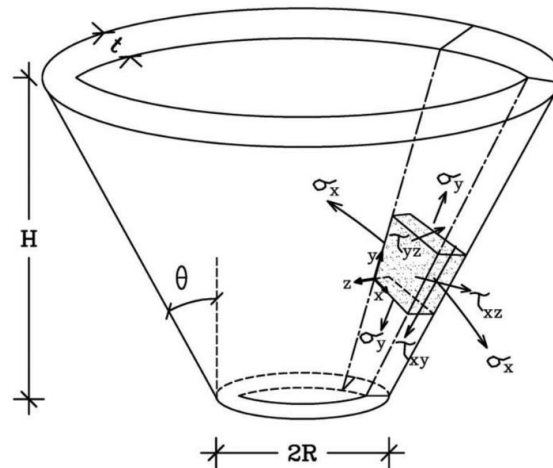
VENTURI CONE PIPING 3D STRESS ELEMENT
